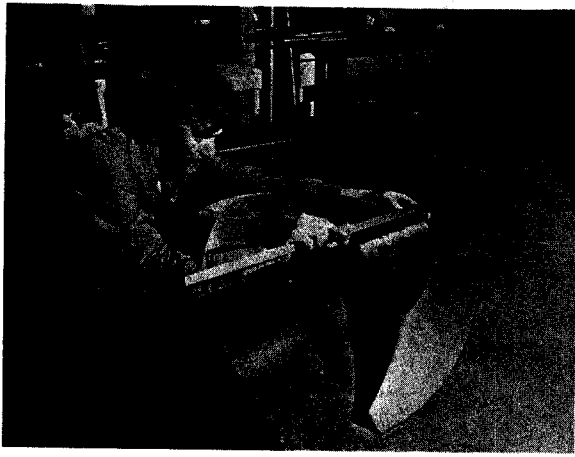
Upper half of a dee in preparation for locating the dee stem attachment collar.
